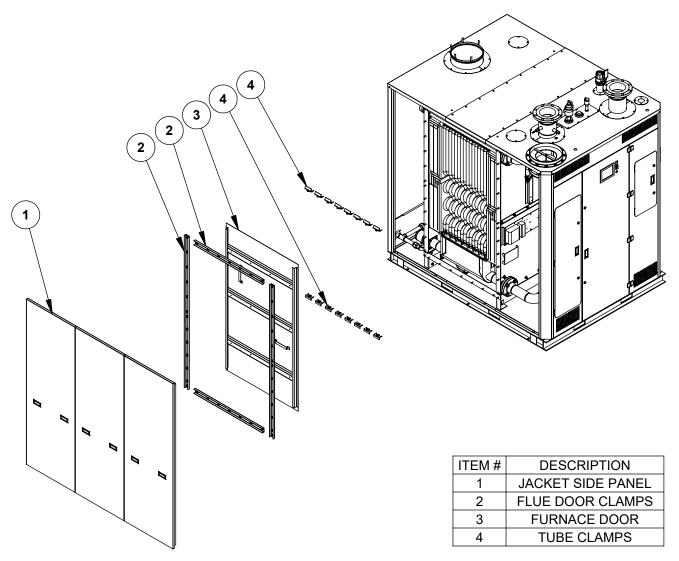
Panel Removal in Preparation for Tube Inspection, 3000 - 6000
